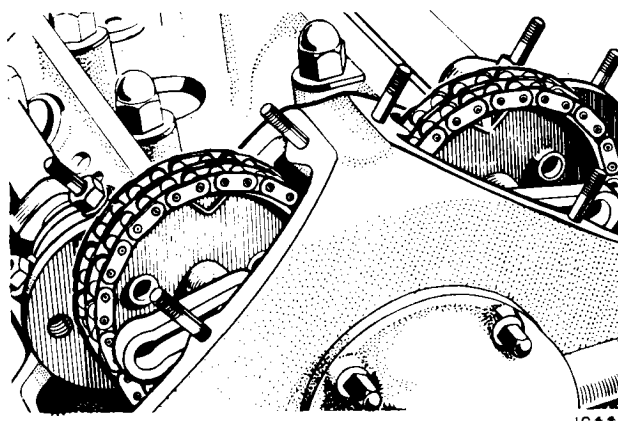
Showing the camshaft sprockets disconnected from the camshafts.
